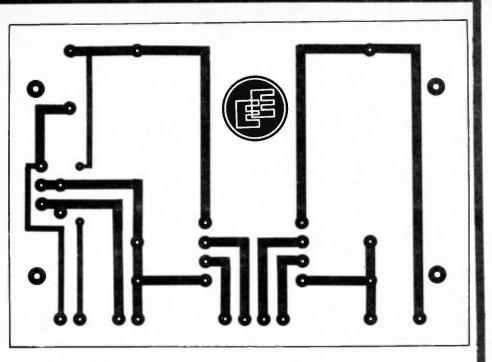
Component layout and full size printed circuit board master (opposite page) for the 0-20V variable supply.
